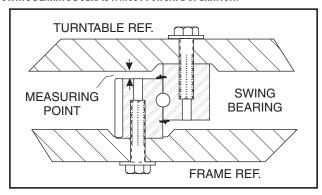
Swing Bearing Tolerance Measuring
